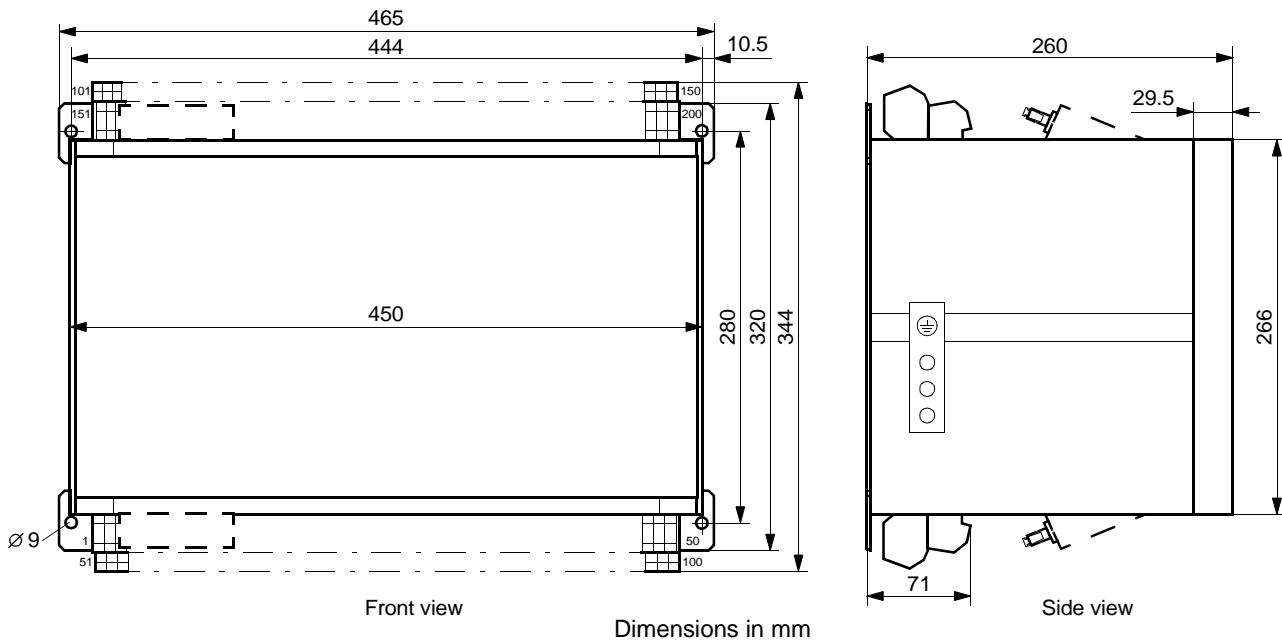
Dimensions 7UT633 or 7UT635 for panel surface mounting (size $1/1$)
